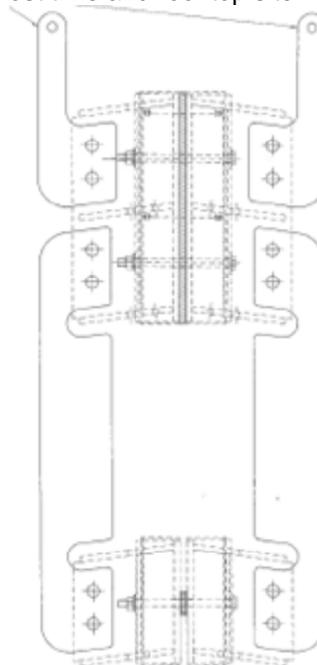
FEGL Shop Drawing of Clamp Installation Jigs
